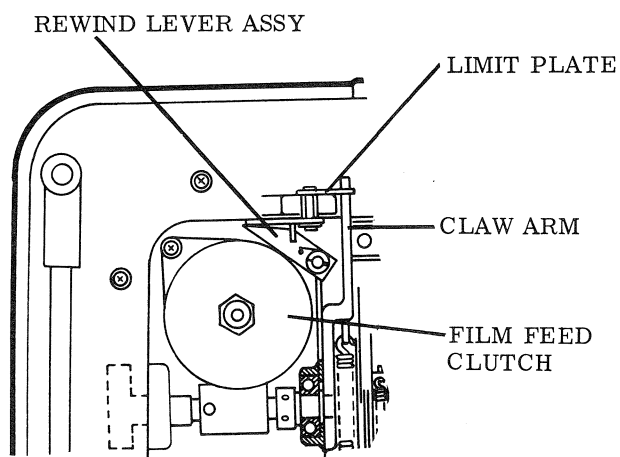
REWIND ENGAGEMENT AND FRAMING LIMITS
